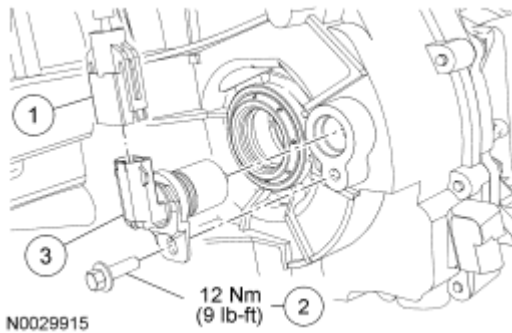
Exploded View Of Output Shaft Speed (OSS) Sensor With Torque Specification
